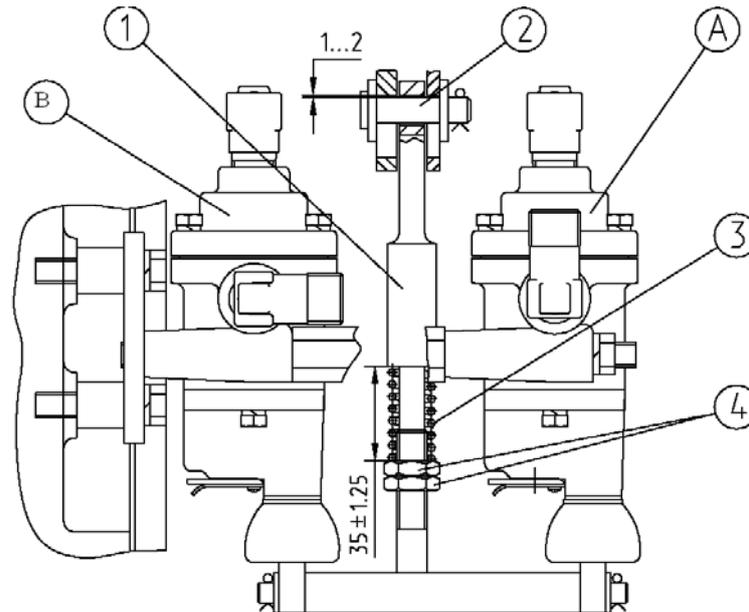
Check and adjust drive of single-wire and two-wire brake valves of pneumatic system
